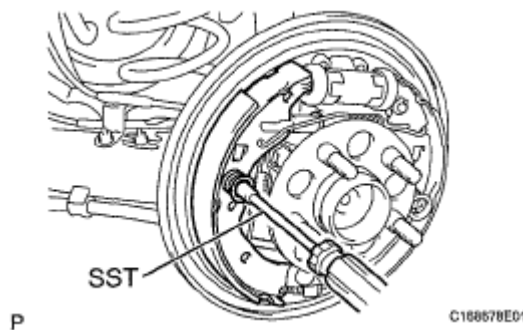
Removing Shoe Hold Down Spring Cup And Shoe Hold Down Spring
